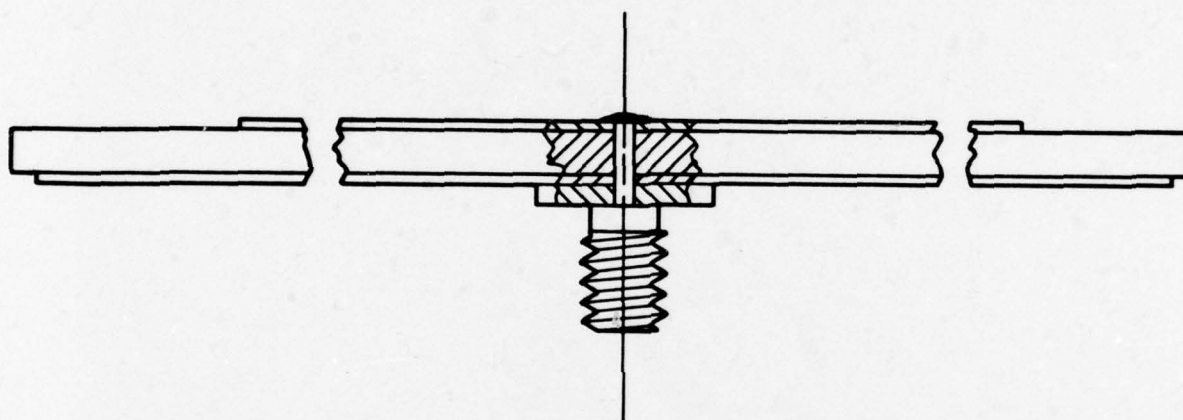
DETAIL OF PATCH RADIATOR REAR FEED STRUCTURE
